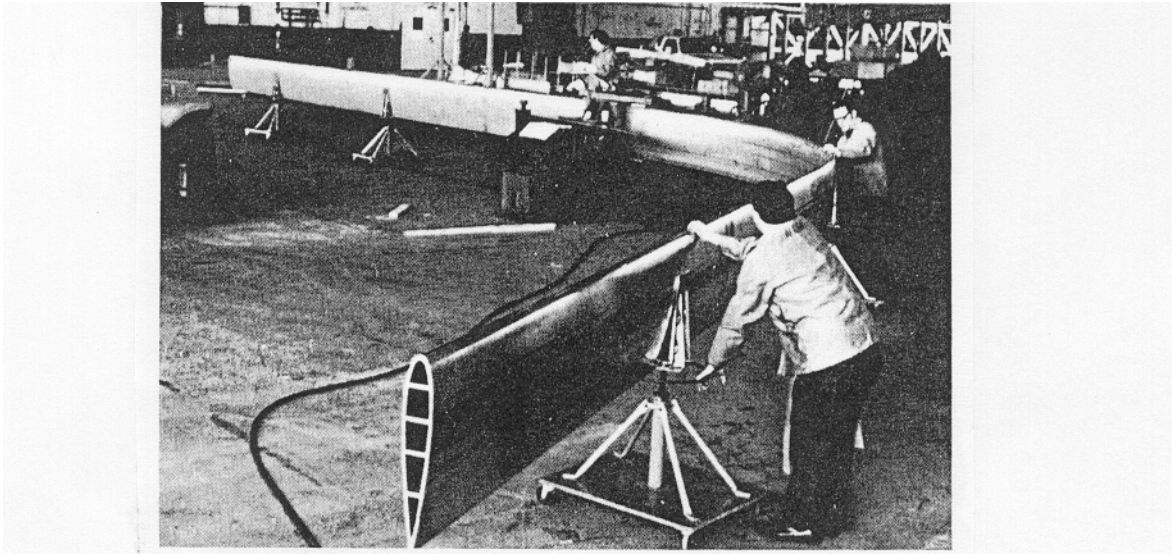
Extruded aluminum blade of 17-m Darrieus during fabrication. (Courtesy of Aluminum Company of America.)
